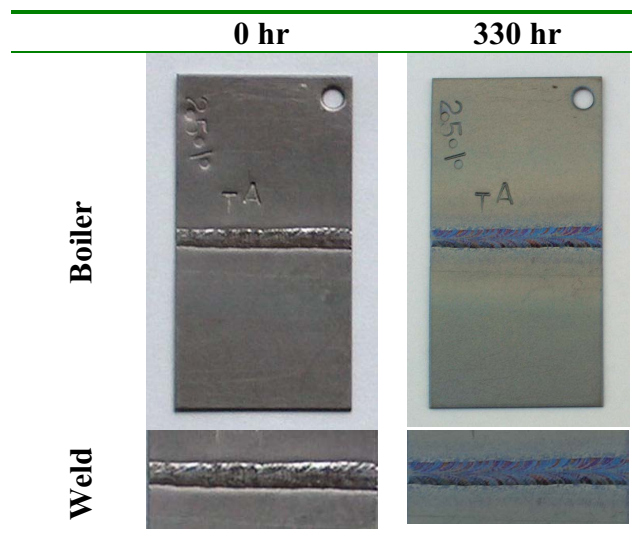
Ta-2.5W coupon tested at the boiler condition for 330 hrs.
